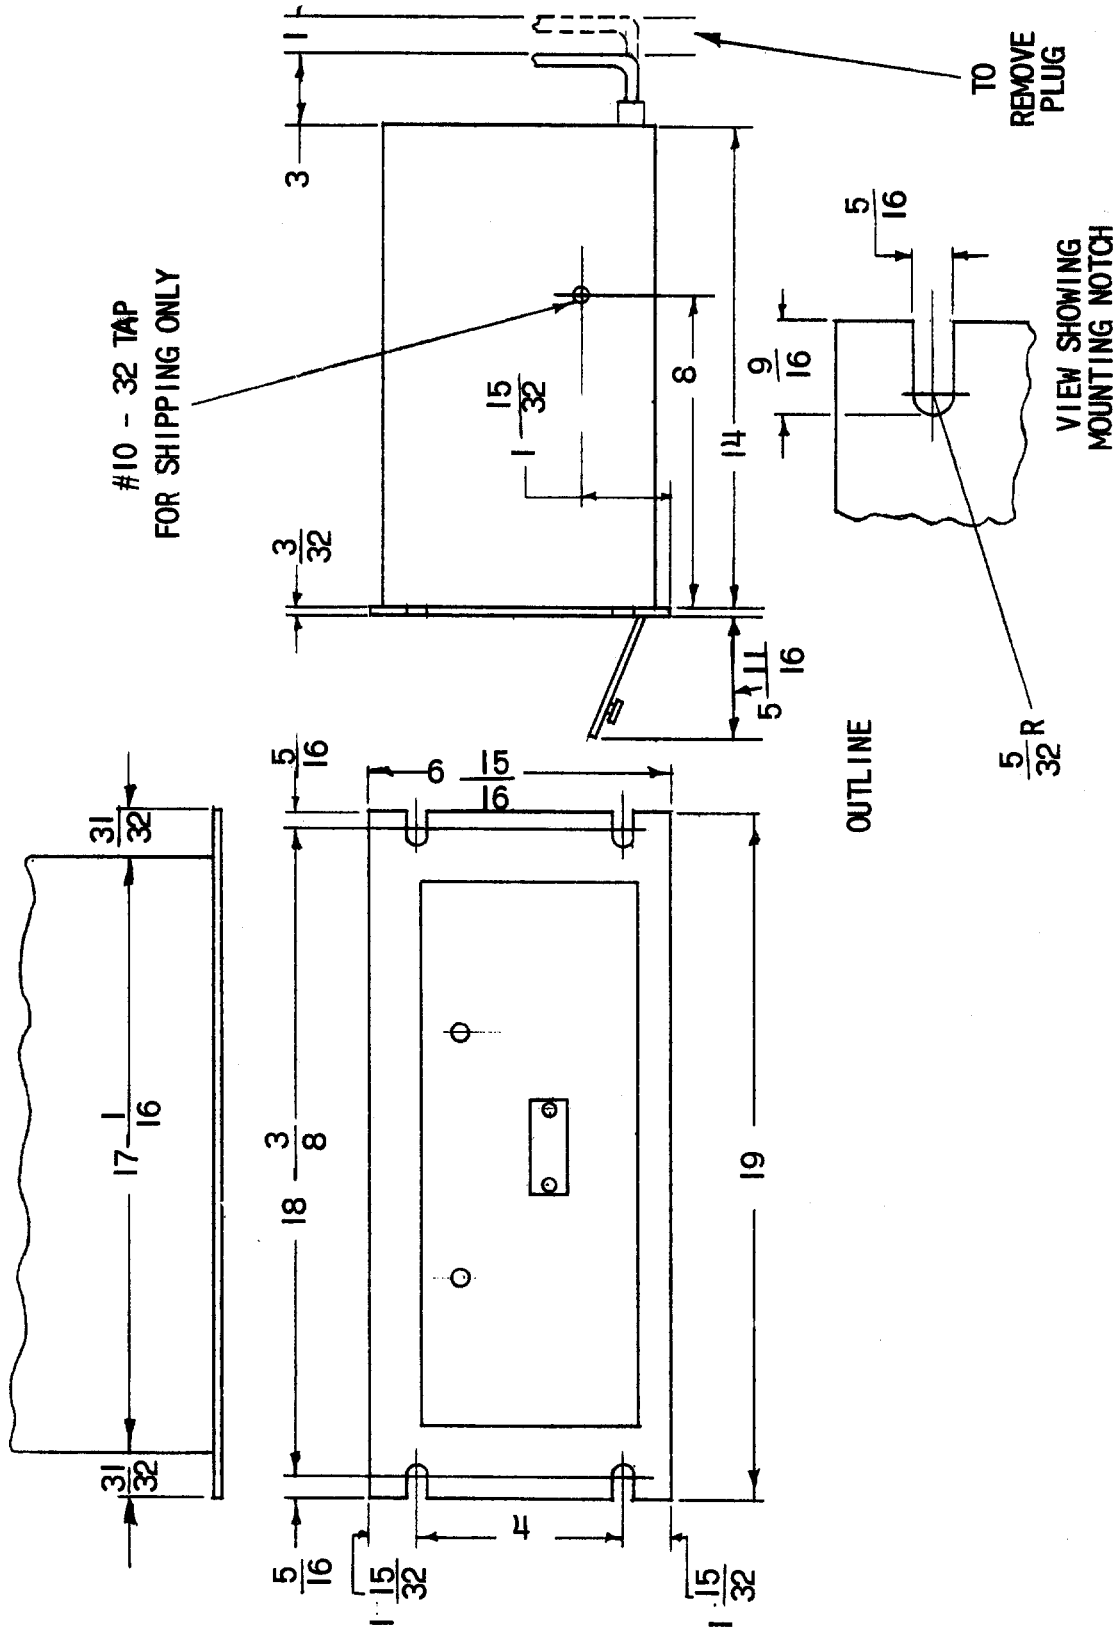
(0227A2037-0) OUTLINE AND MOUNTING DIMENSIONS
